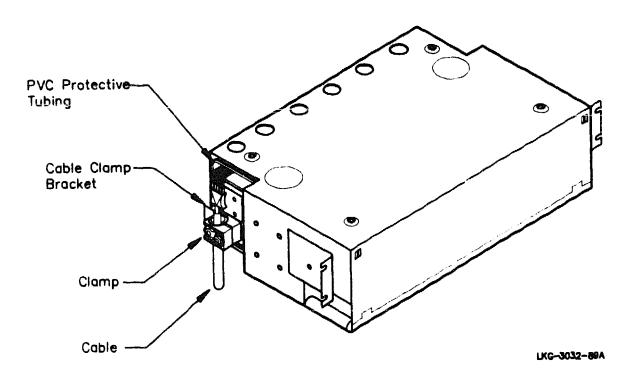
Outdoor Cable Installation (Bottom Cable Entry)
